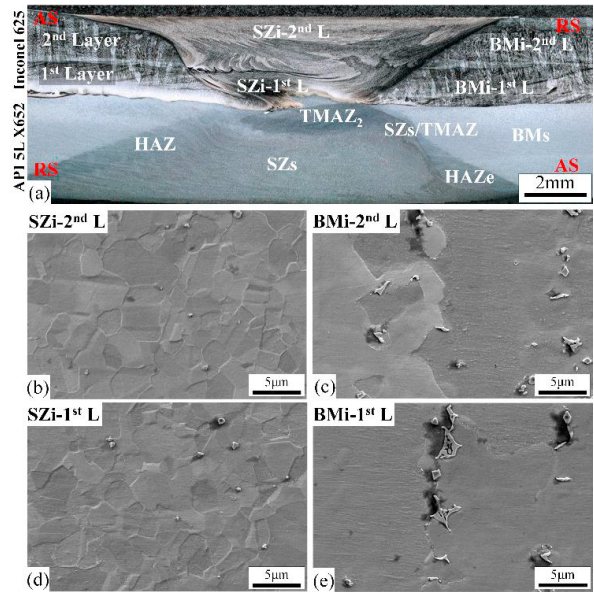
(a) Macrograph of the weld, showing the Inconel 625 layers and the different Inconel welding zones at the top and the API 5L X65 at the bottom of the weld. The SEM micrographs (b-e) show the Inconel zones in detail. 2nd layer stir zone of the Inconel 625 (SZi-2nd L); 1st layer stir zone of the Inconel 625 (SZi-1st L); 2nd layer Inconel base material (BMi-2nd L); 1st layer Inconel base material (BMi-1st L); stir zone of the steel (SZs); second thermo-mechanically affected zone (TMAZ₂), heat-affected Zone (HAZ), external heat-affected Zone (HAZe) and base material of steel (BMs). Retreating side (RS); advancing Side (AS).
